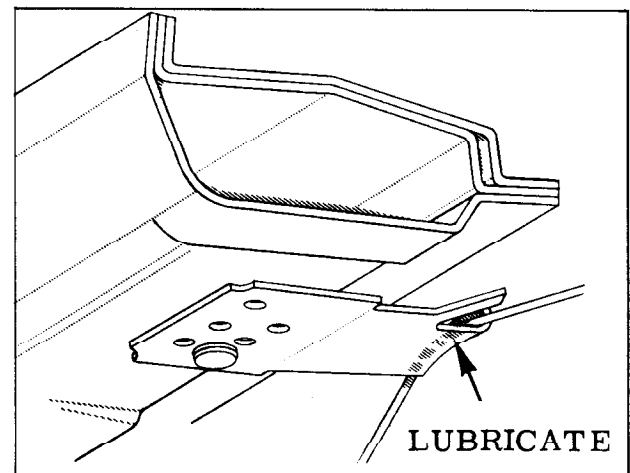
Seat Adjuster Locking Wire Retainer
